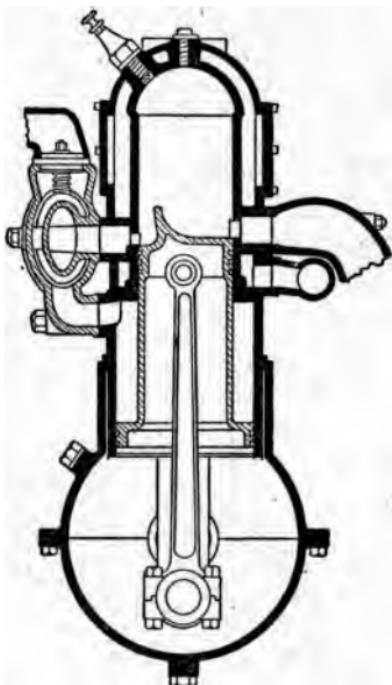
Sectional diagram of a "differential" or two-diameter piston engine, showing annular chamber into which fuel is drawn, instead of into the crank case, also the special by-pass valve for inducting the compressed charge into the cylinder.
